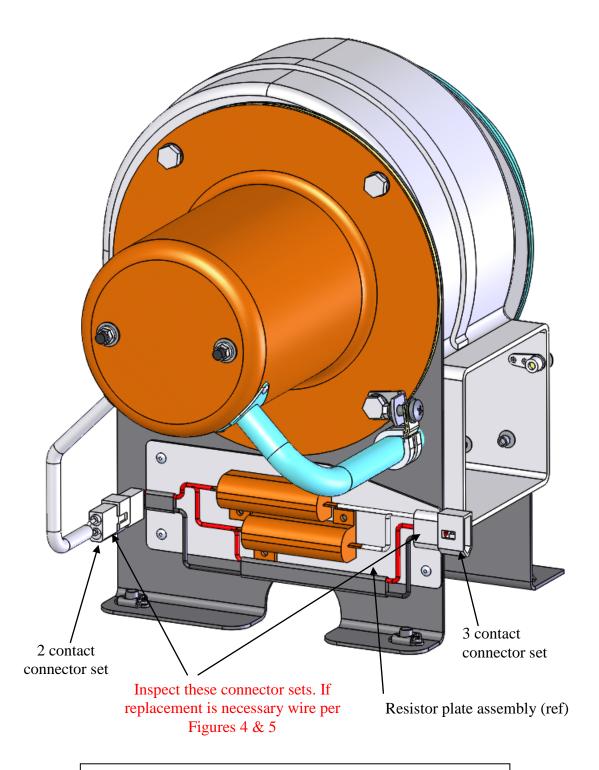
Aft Evaporator Blower Assembly S-6102EC-4 used in the 407EC-202-1,-2,-3 and 407EC-203-2 AC kits
